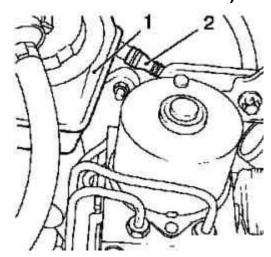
Supply line and tank brake hydraulic system: 1 - tank brake hydraulic system, 2 - the supply line
